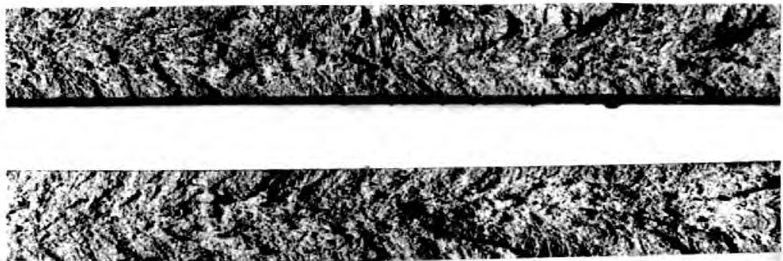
Fracture surface corresponding to fig. 7.17. Half actual size.
